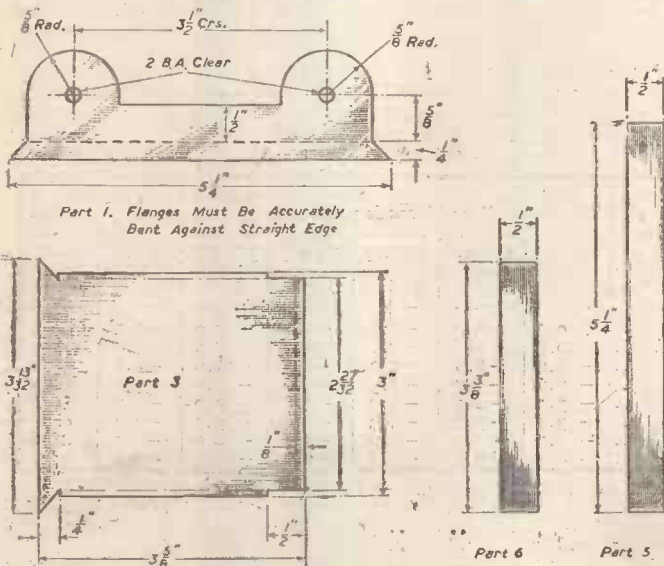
Details of side plates, and blank for forming cylindrical cover.
